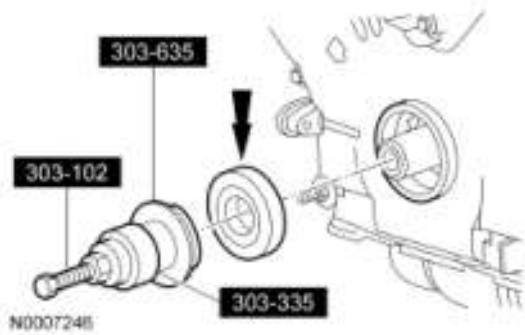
Installing Crankshaft Front Seal Using Special Tools
